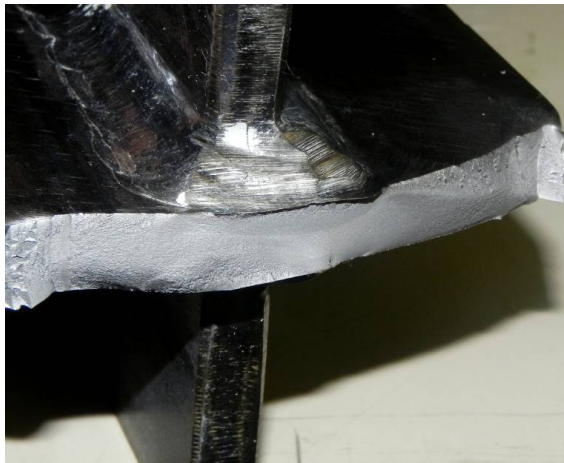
Crack initiation on as-welded joint (weld toe)
